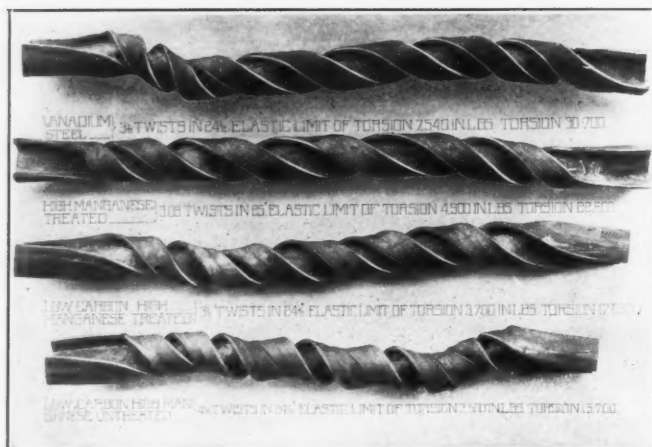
Axle Steel Samples showing Difference in Physical Qualities Length, 52 inches; Depth, 2 inches; Width, 1.1-2 inch; Thickness of Flanges, 3-16 inch at Edge, 3-8 inch at Web; Thickness of Web, 3-16 inch.
